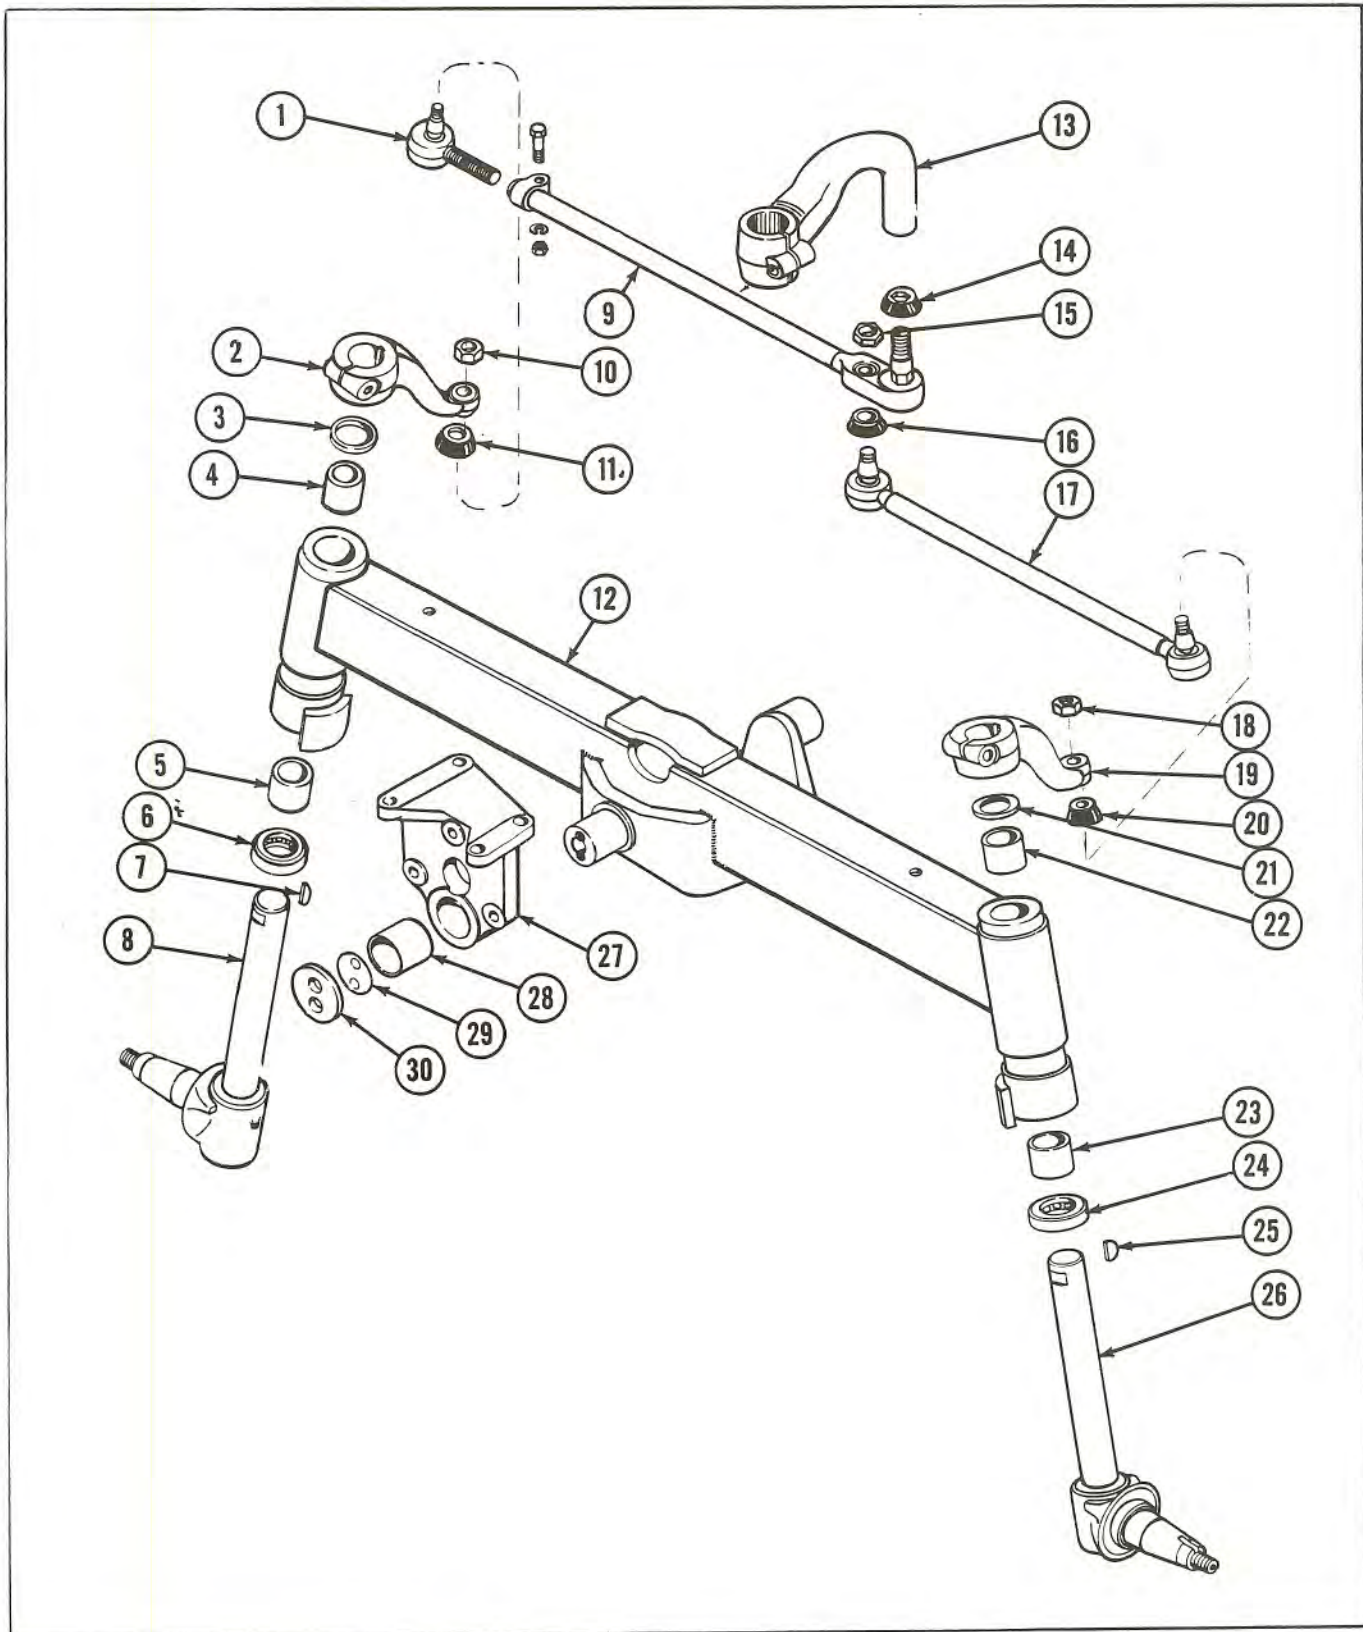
MF 65 Utility Front Axle Assembly Nomenclature.
